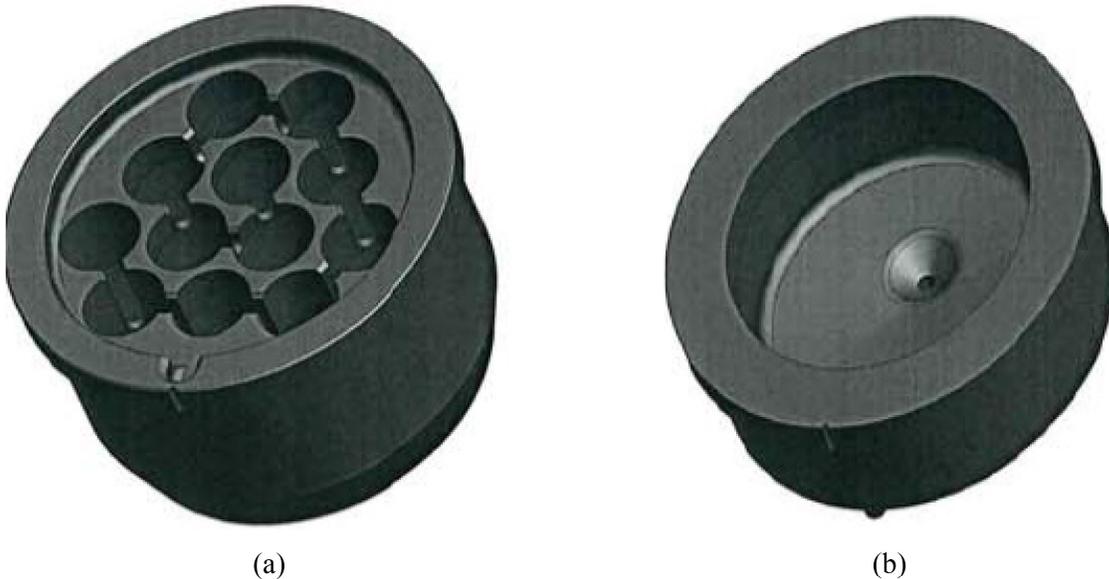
Two piece graphite crucible for drip casting with the lower (a) and upper (b) pieces.
